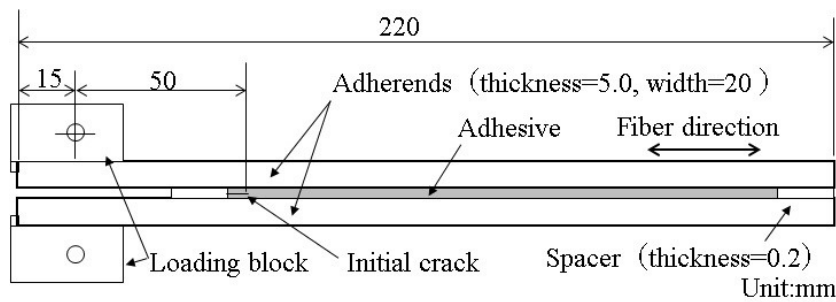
Shape and sizes of adhesively bonded DCB specimen.
